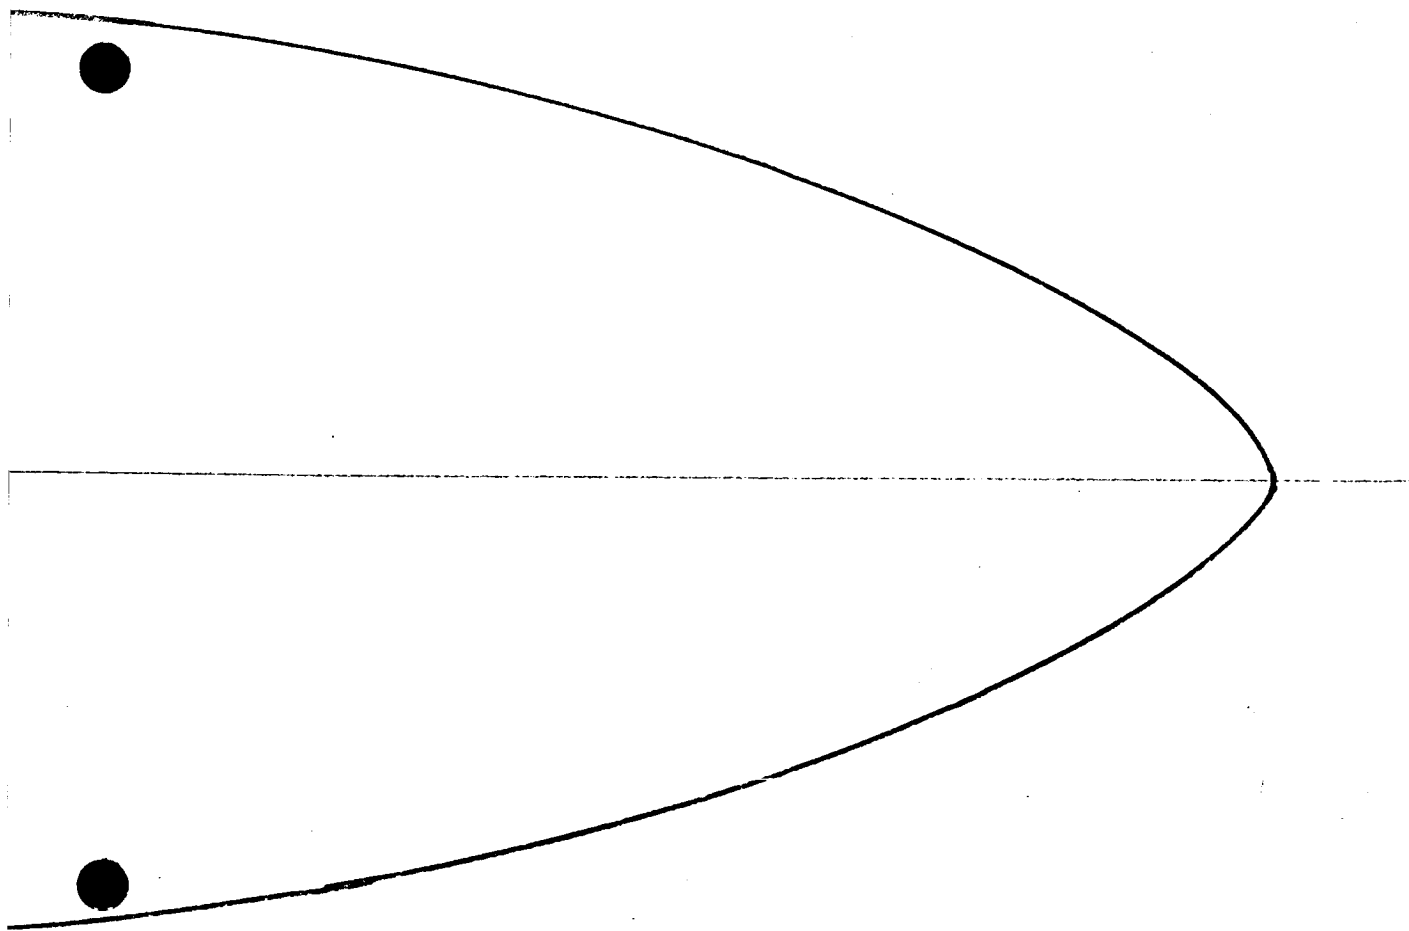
Thermal Pattern for Weld Panel 2
